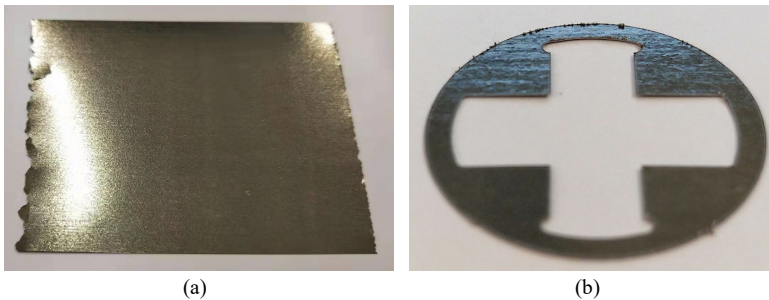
Cutting results of the 10JNEX900. (a) Shearing. (b) Laser.
